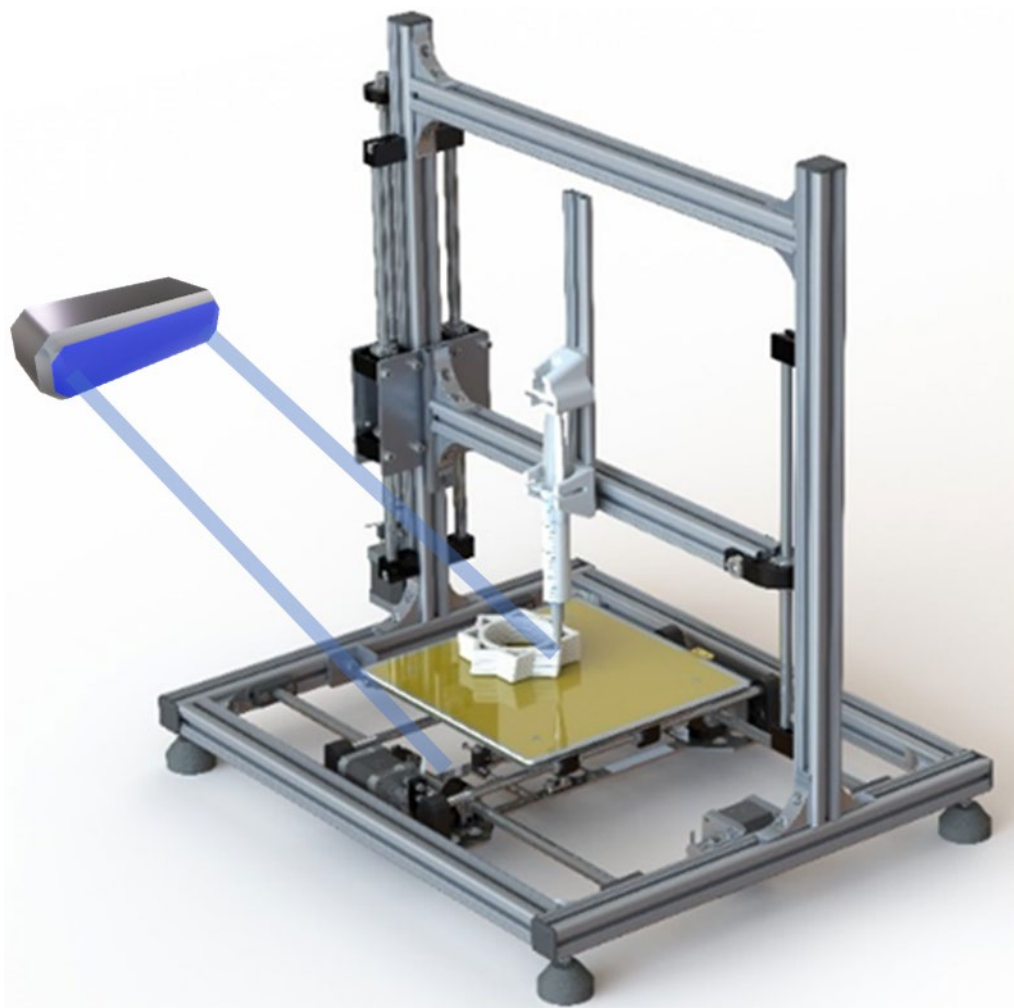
Setup of UV light with Vellemen K8200 produced using SolidWorks.
